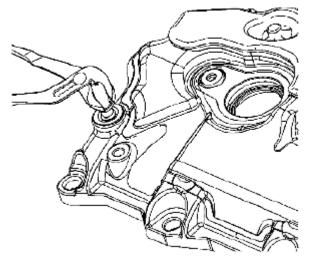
Inspecting Interior Of Right Camshaft Cover Courtesy of SUZUKI OF AMERICA CORP.
